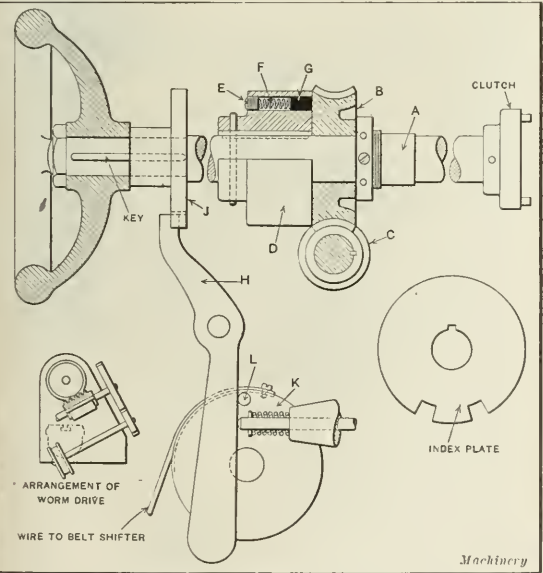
Arrangement of Friction Feed Mechanism on Powder Train Groove Roughing Machine
